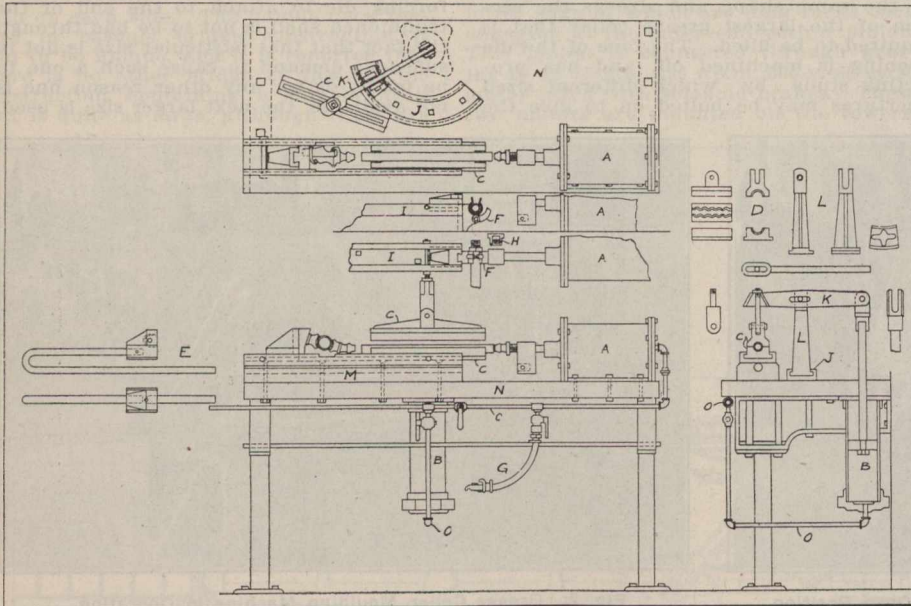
Details of Machine for Mounting and Dismounting of Air Hose Connections.
